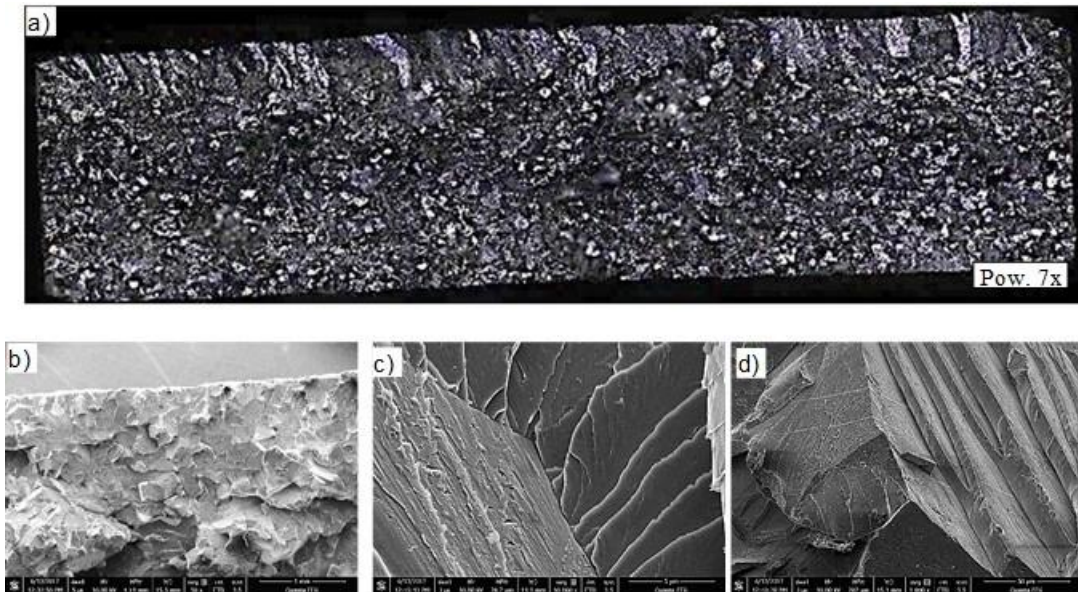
Microstructure of flat sample fracture of 1.4539 austenitic steel welded joint obtained in a static tensile test
